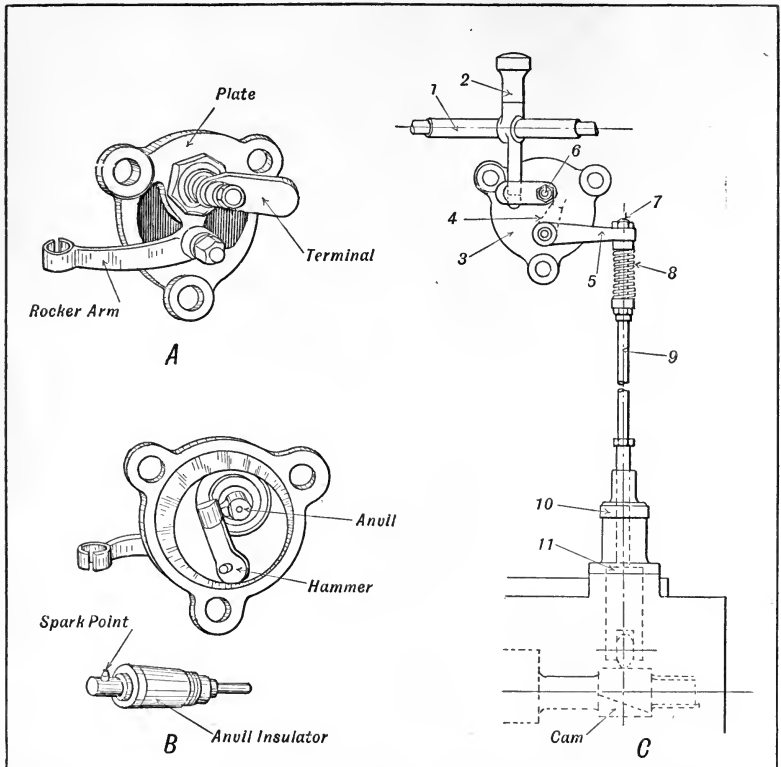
Low-Tension Ignition Plate by which Spark is Produced in Some Locomobile Engine Cylinders. A—External View Showing Rocker Arm. B—Interior View Depicting Contact Points. C—Method of Operation.
